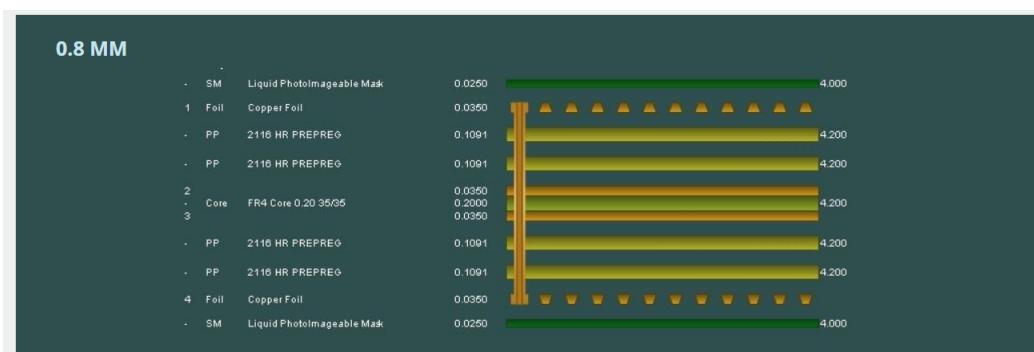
PCB Train's 4 Layer 0.8mm Layer Stack
